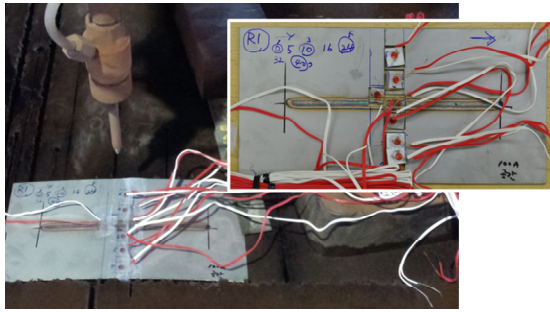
Water jet cutting of strain gauges attached to welded specimens.
